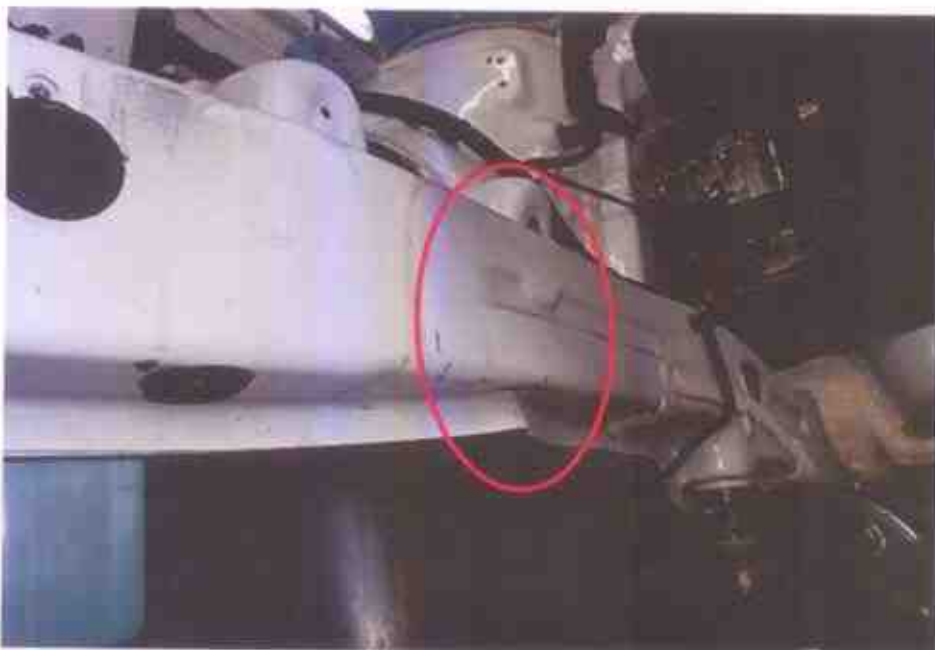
shows a closer view of the centre section of the front right chassis that was found to be bent (circled).
